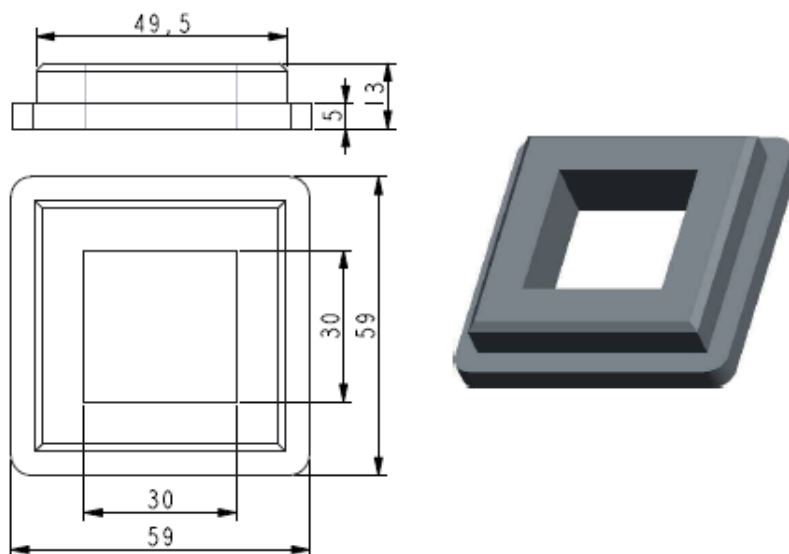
Insert for the inspection window. The dimensions of the insert are in mm.
